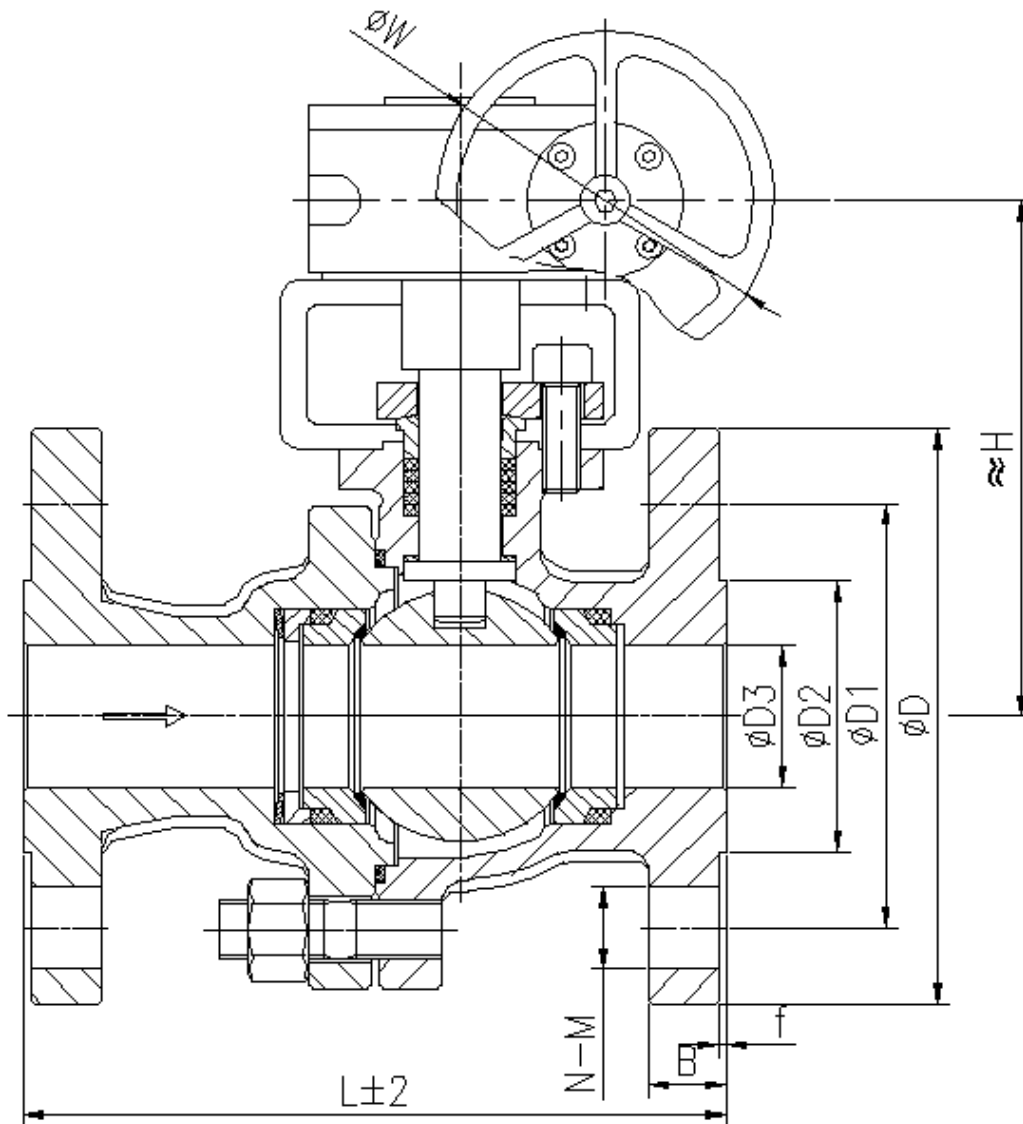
Dimensions of Linor floating ball valve with high temperature seat lever, PN16, flanged, sizes DN15-80
